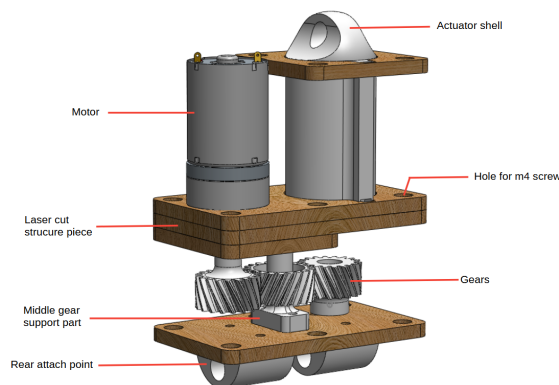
Final design of the actuator, white parts are 3d printed.
